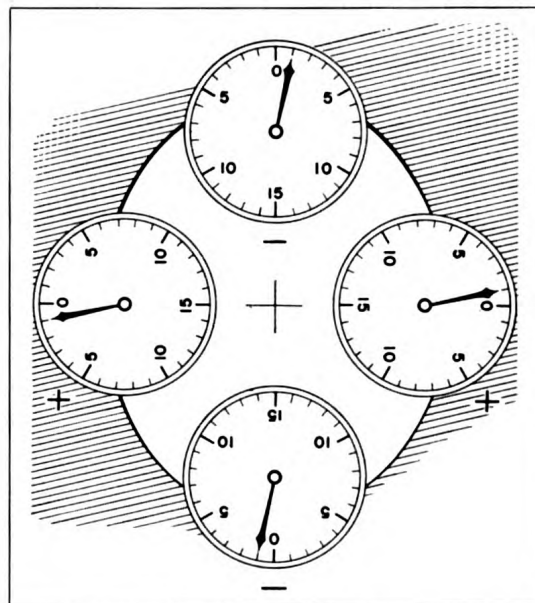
Typical indicator readings revealing an elliptical hole.
